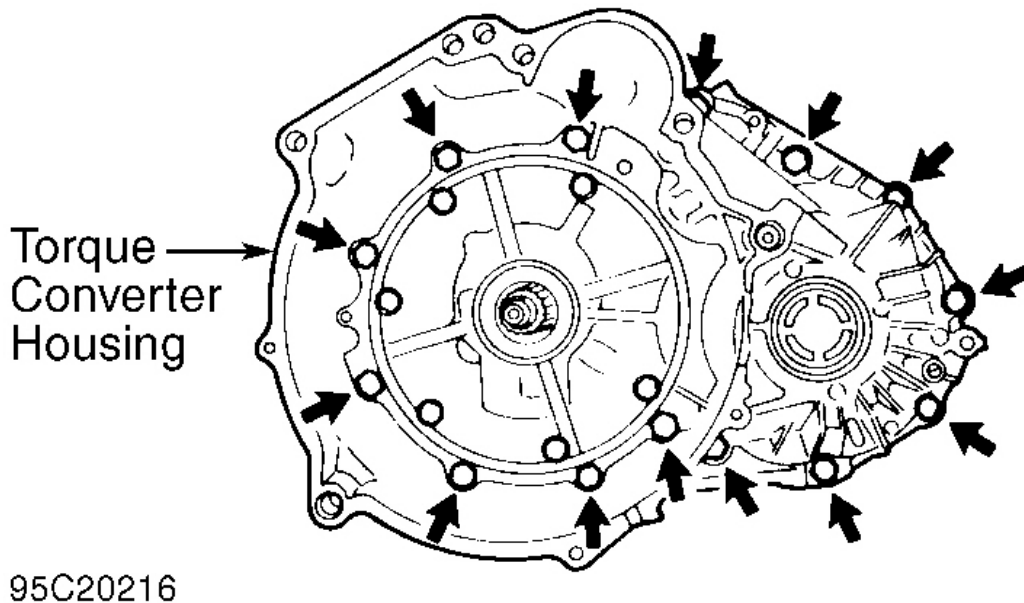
Torque Converter Housing Bolts & Torque Converter Housing
